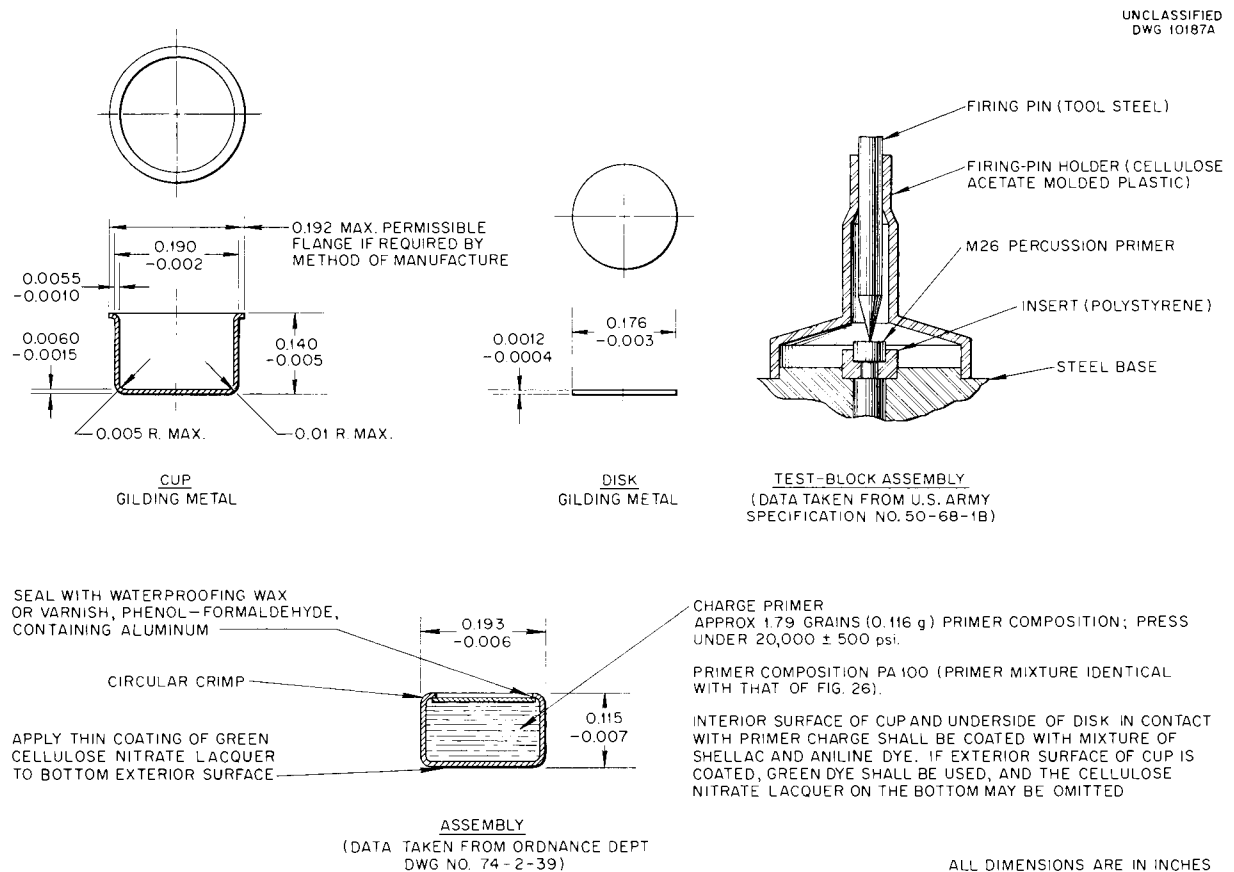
Detailed Diagram of M26 Primer and Test-Block Assembly.
